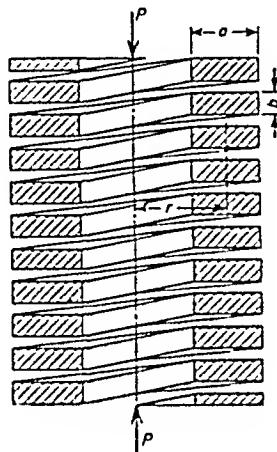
Helical spring of rectangular wire coiled flatwise.
